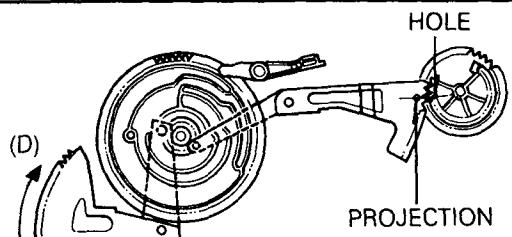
Rack Gear F.L./Rack Gear T/CAM Gear
